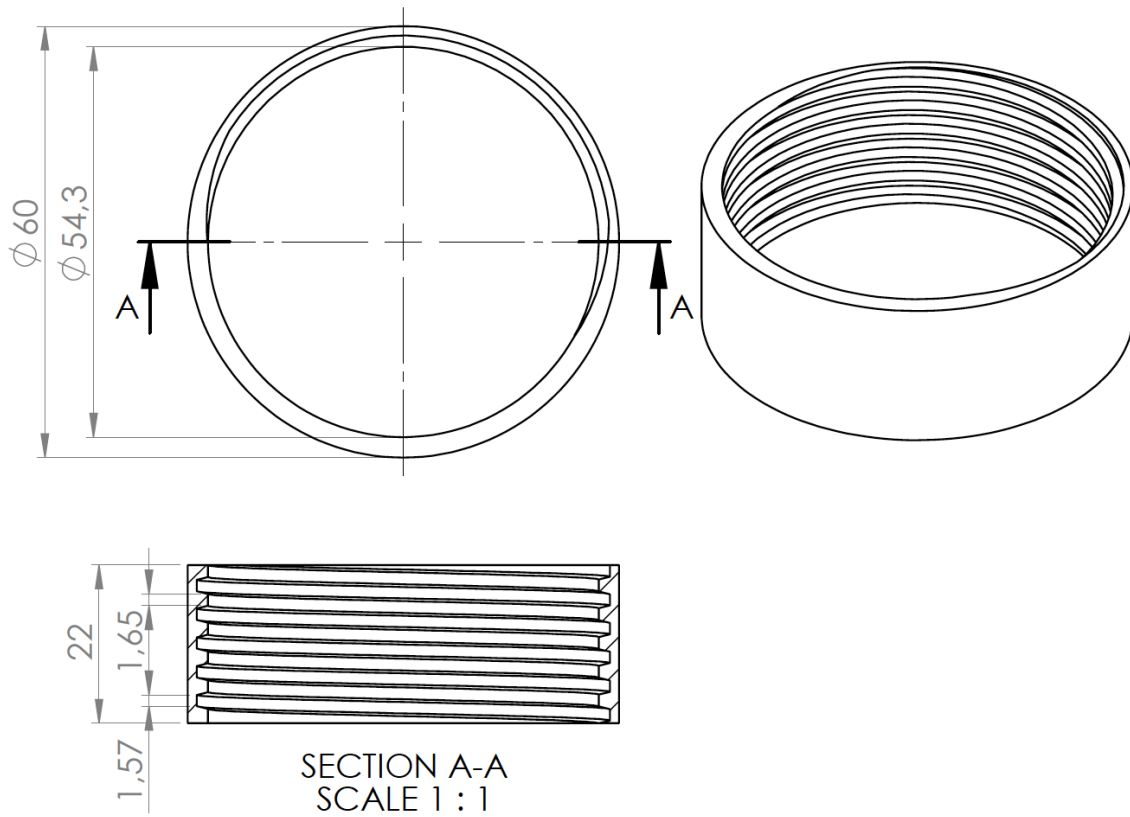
Selection of component views and dimensions (mm), C6 - Cap
